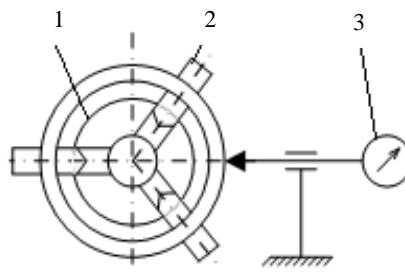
Scheme for measuring radial runout of the tubular parts and couplings:
